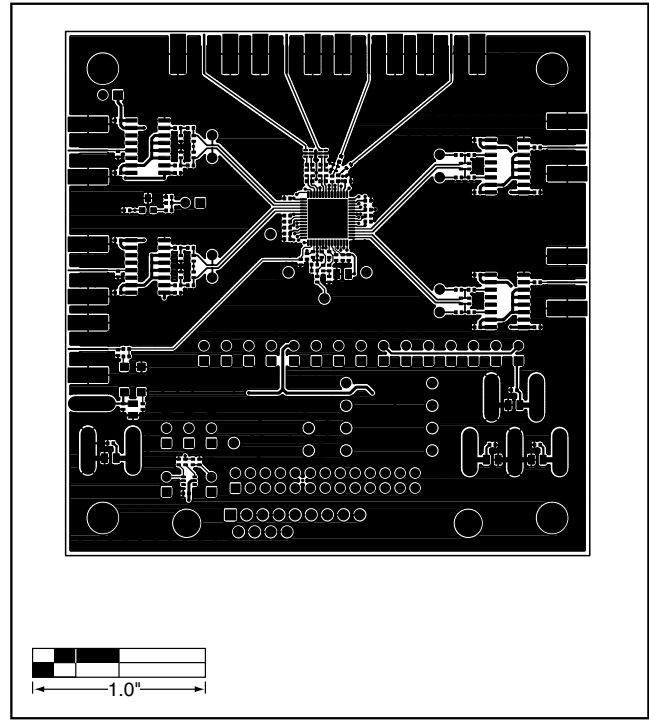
MAX2828/MAX2829 EV Kit PC Board Layout—Component Side
